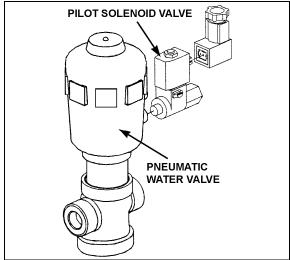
CENTRAL HOT WATER PNEUMATIC VALVE ASSEMBLY 22329
